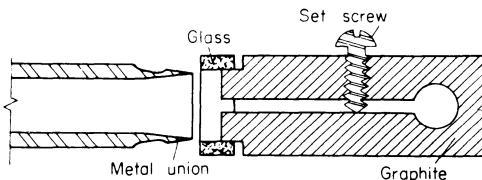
Tool for making glass beads for Housekeeper seals. Reproduced from Whitehead^{1307a} (*Courtesy of Pergamon Press*)
